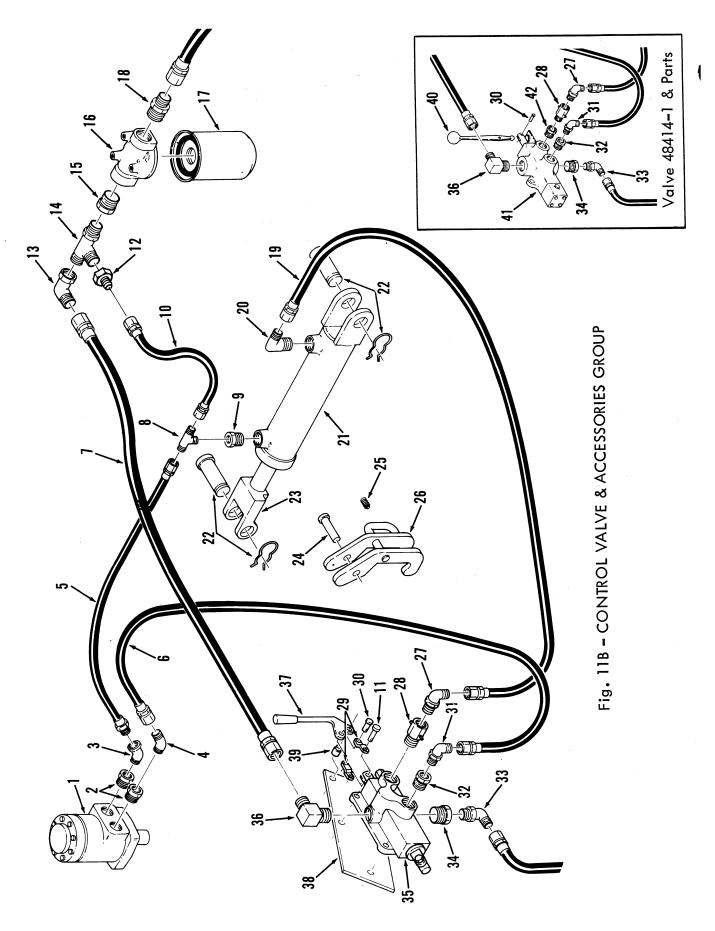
B - CONTROL VALVE & ACCESSORIES GROUP
